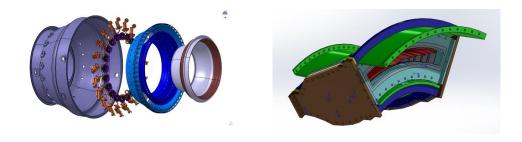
Exploded view of the CAD model and the sector of the combustor
